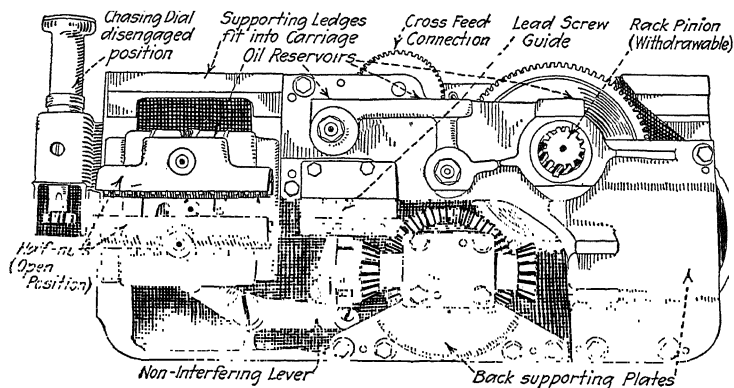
Inside view high-duty lathe apron. (The American Tool Works Company.) Note the rigid back plate construction; the non-interfering lever; the bevel gears in neutral position. In this view the chasing dial is held vertically, in some models (Fig. 33) it is held horizontally.
